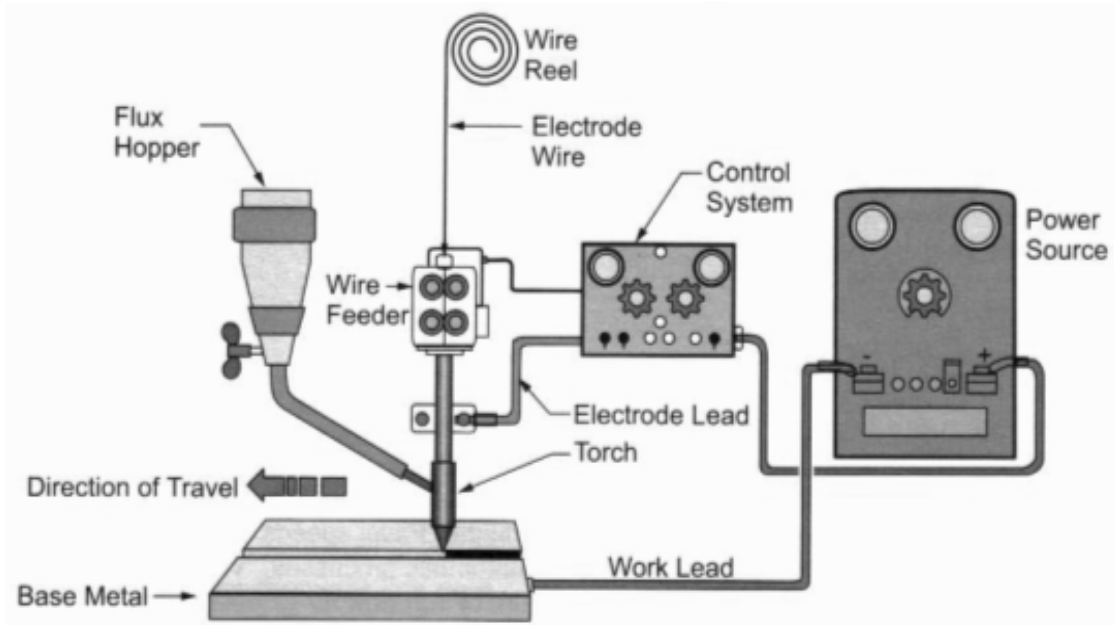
Equipment set-ups for Single Wire Submerged Arc Welding [18]
